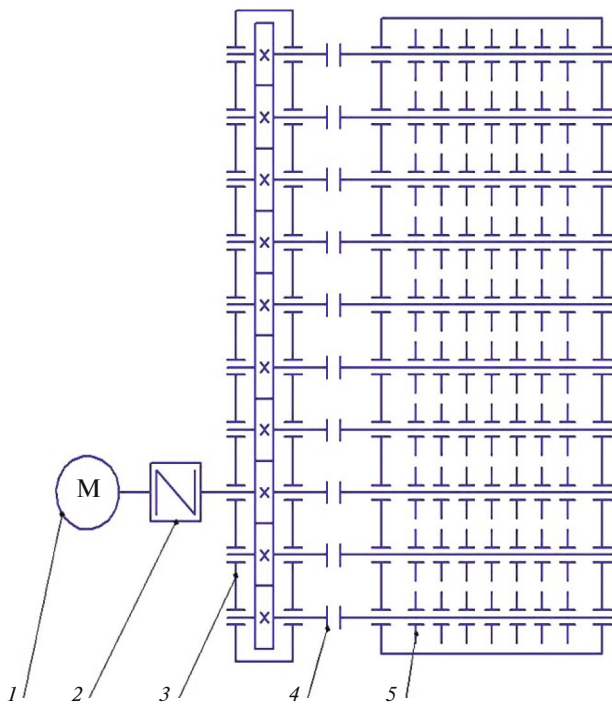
Kinematic diagram of the updated drive for the coke sorting stands: (1) gear motor; (2) gear-type coupling; (3) gearbox; (4) equalizing coupling; (5) stands.
